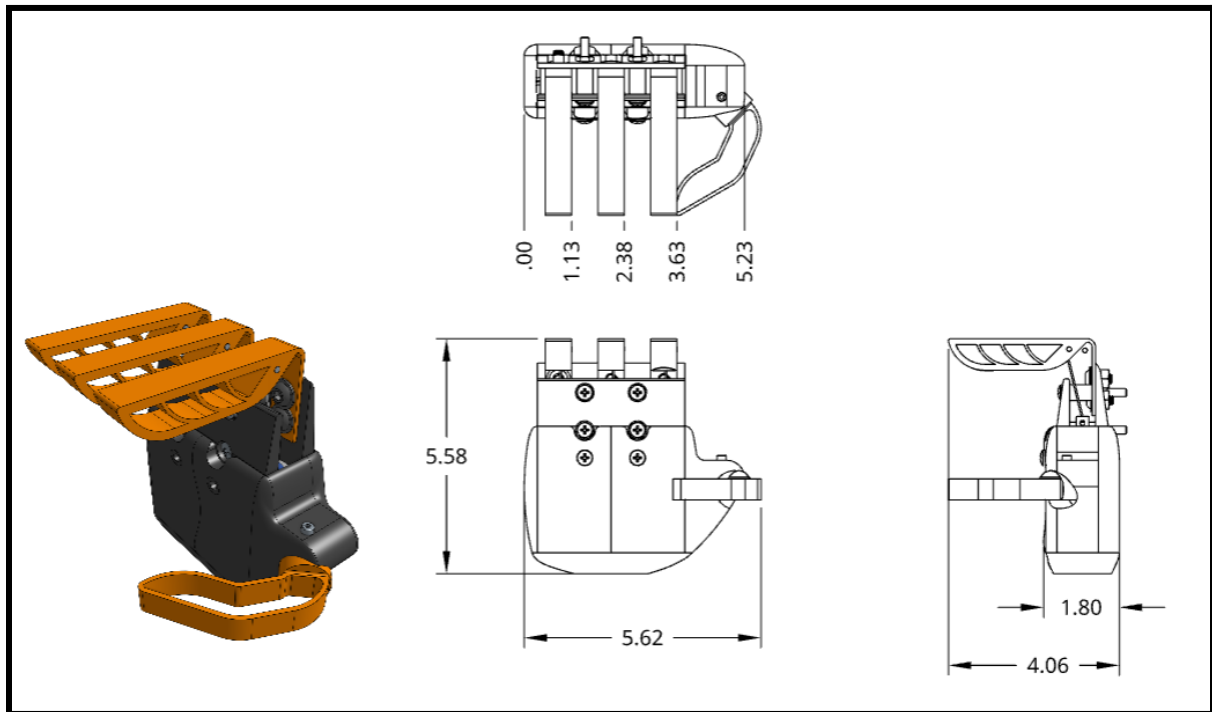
Top, side, front, and isometric views (clockwise listing) of the assembled prosthetic are shown above with the overall dimension of assembly in the resting position. Dimensions are inches and indicate an average to large-sized hand.
